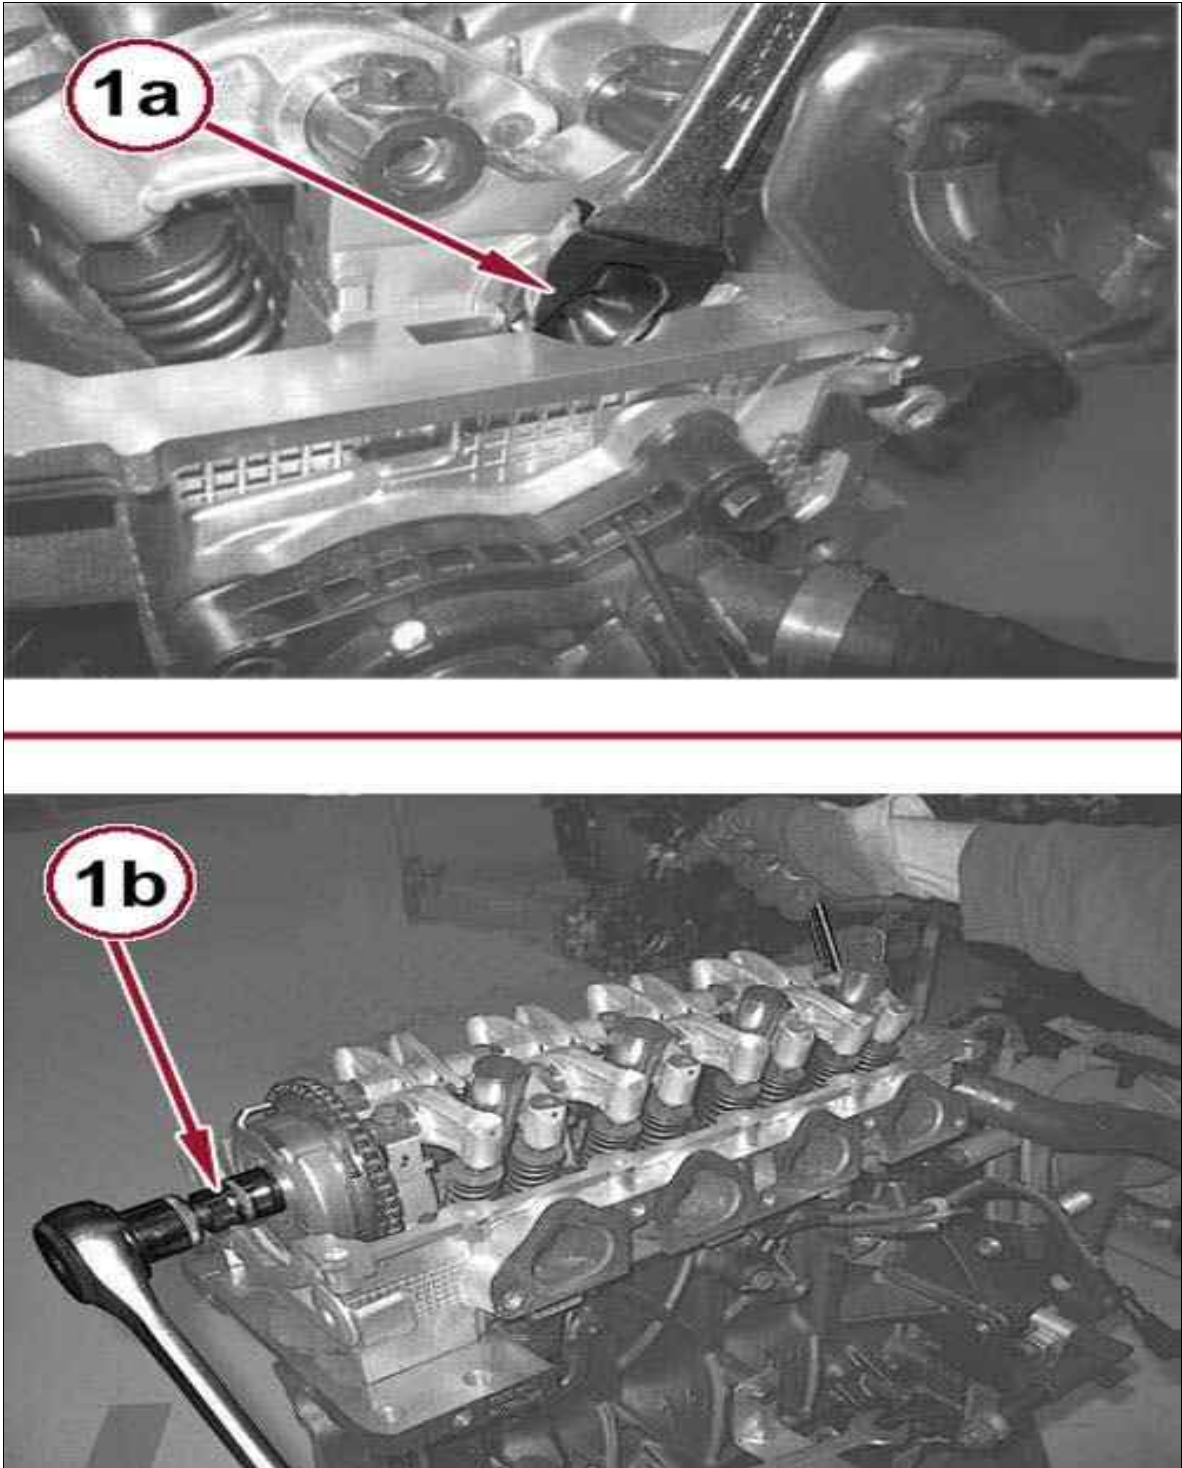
Access Caps For Timing Drive Chain Pad Fixing Screws
